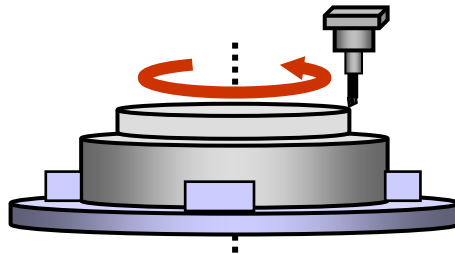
(a) Cutting a large-diameter workpiece by turning it
